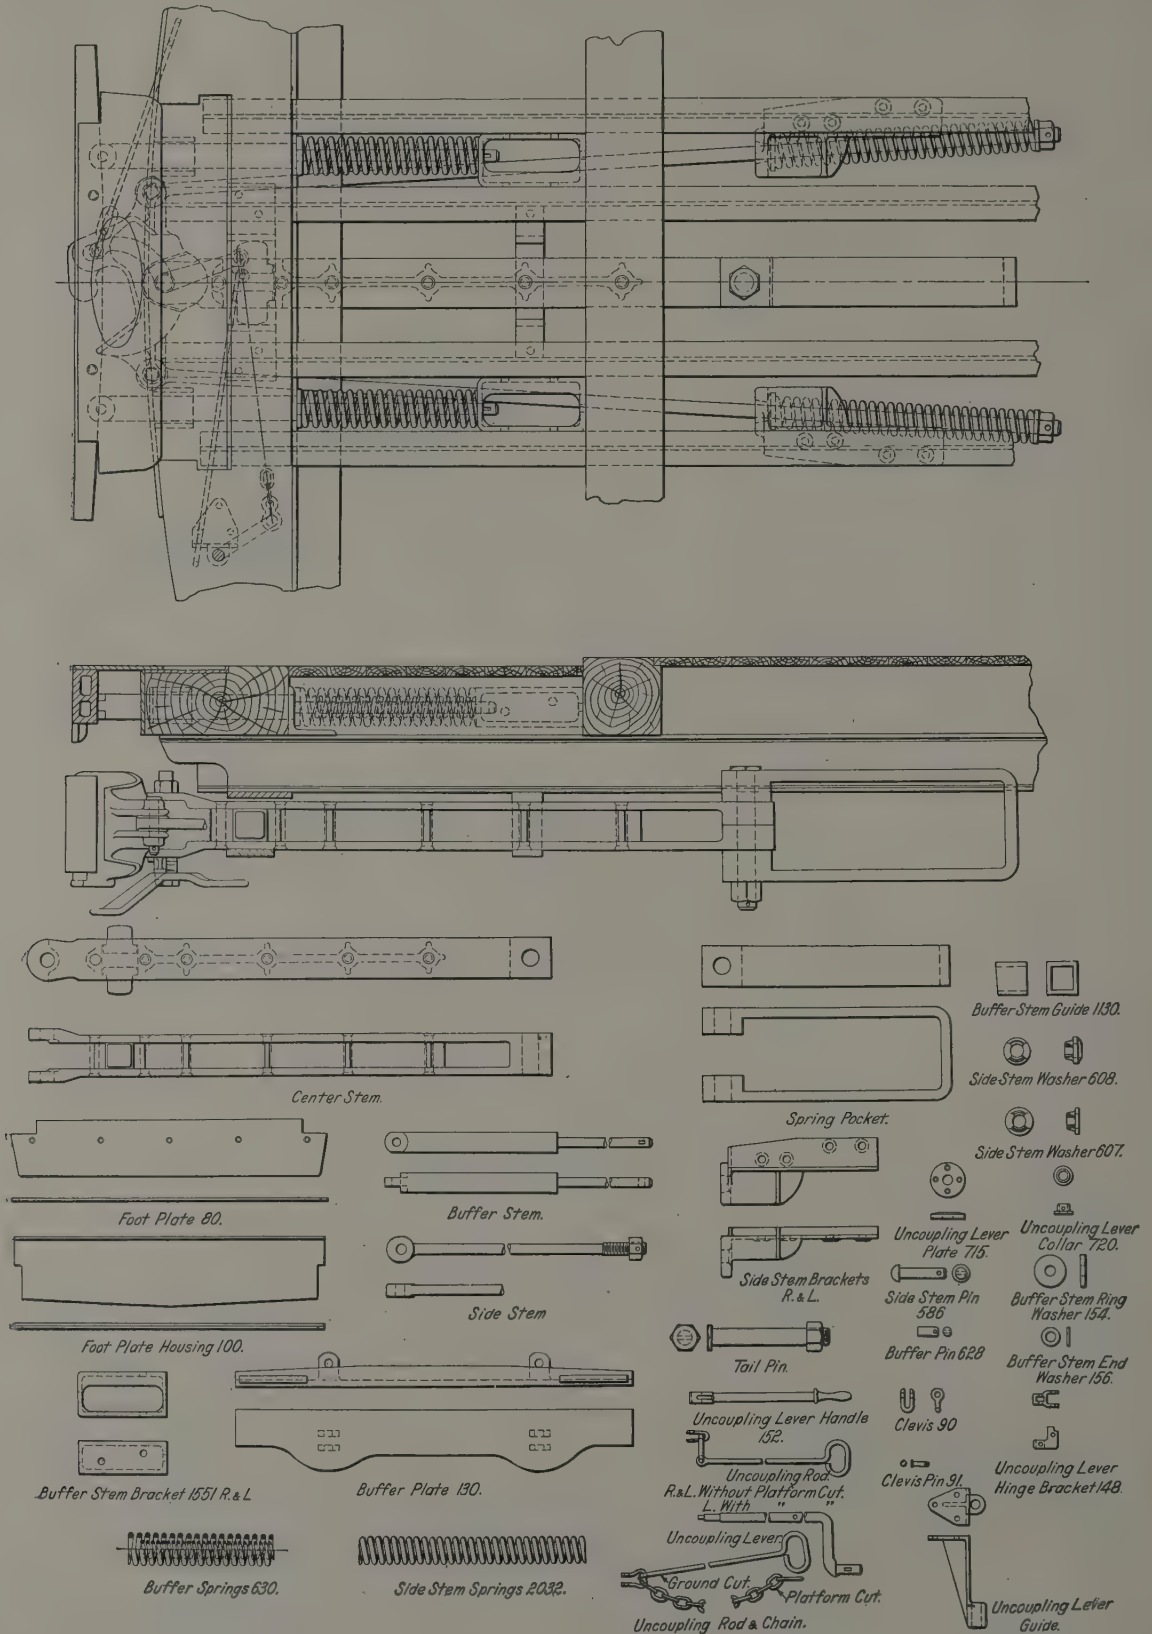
Buhoup Three-Stem Equipment and Parts for Passenger Train Car Platforms.
